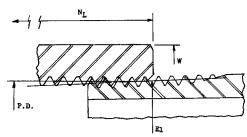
Straight-Tapped Coupling and Pipe (See Table 2 for Coupling Dimensions)
